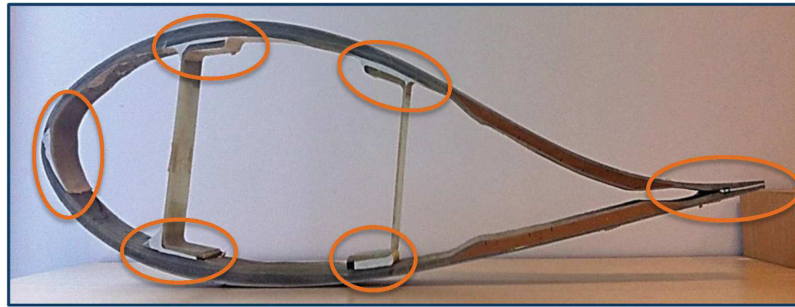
a typical blade cross section; the adhesively bonded joints are highlighted.
